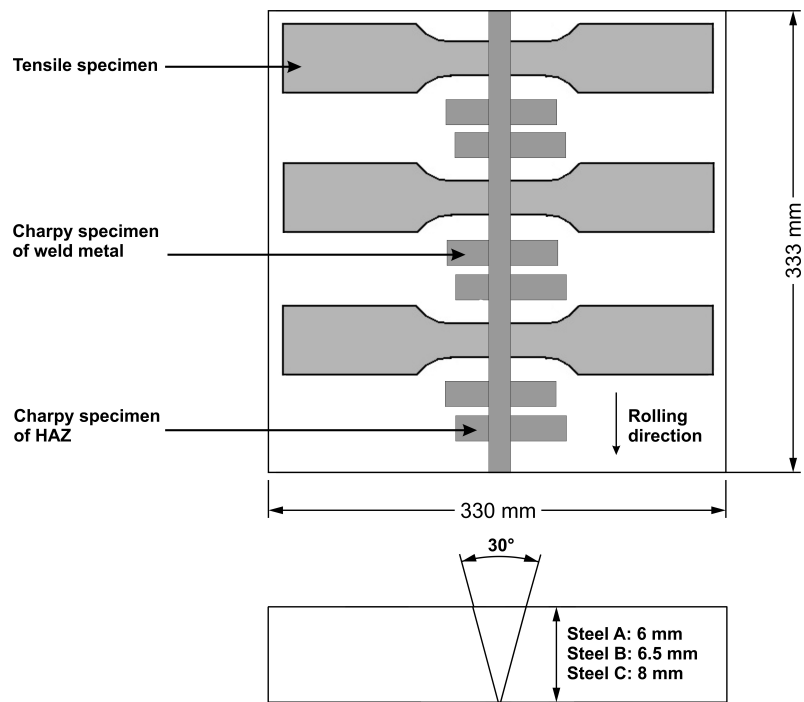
Schematic of welded plates and specimen positions for mechanical tests
